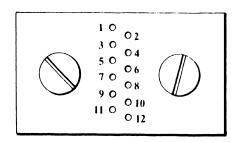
BEARING PLATE FOR PRINT WIRES
